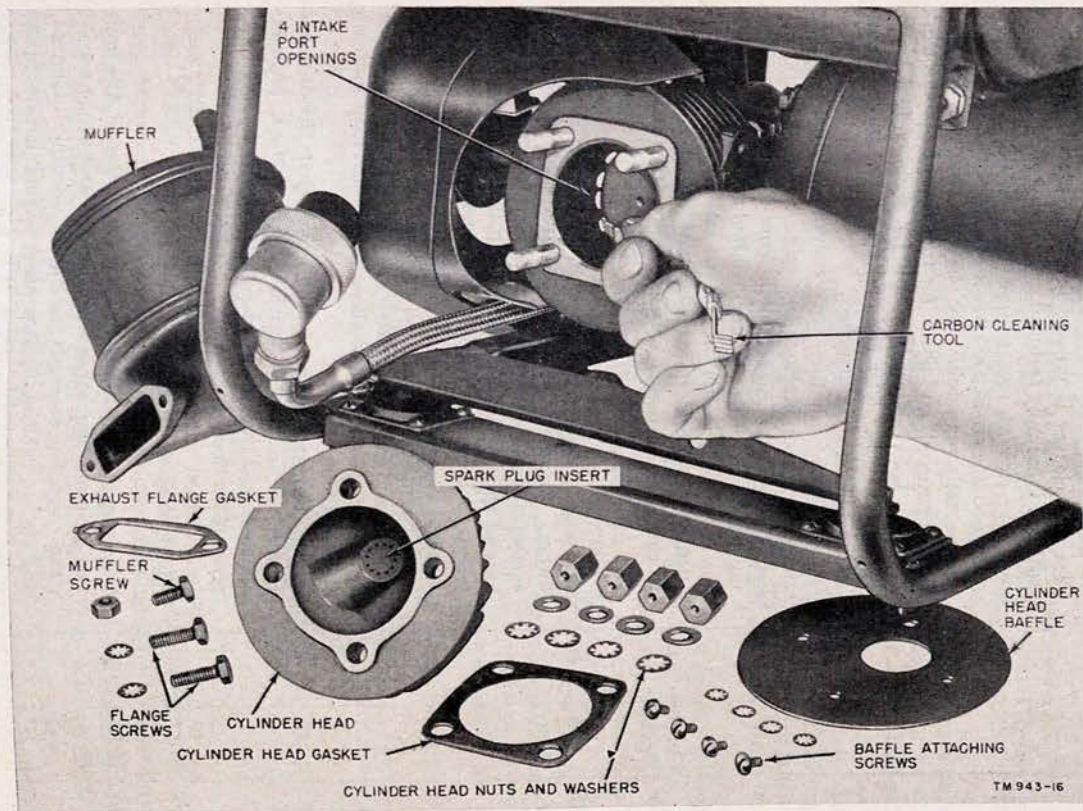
Engine GE-12-F, disassembled for cleaning intake ports.
